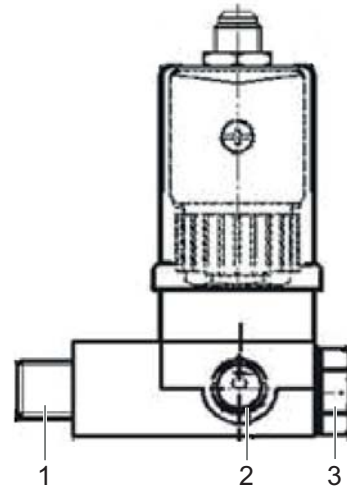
Installing the pilot solenoid on the pneumatic valve
